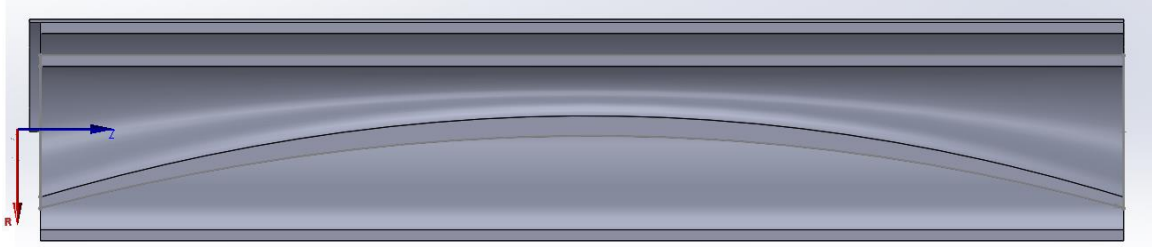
CAD View of Parabolic Shaped Inlet Manifold
